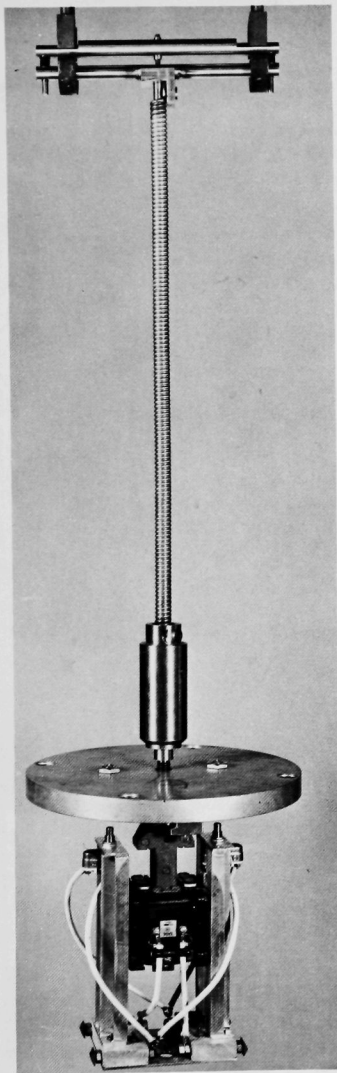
Plug-in Drive Solenoid Supported by Manipulator Tool.
